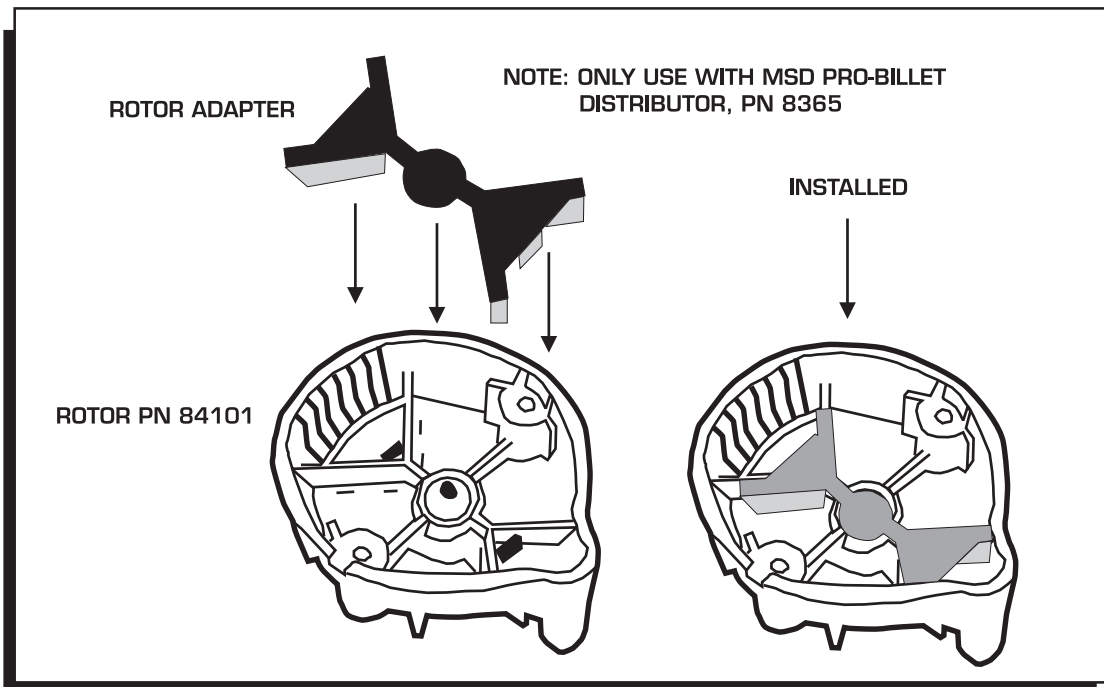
Installing the Rotor Adapter on an MSD PN 8365 HEI Distributor.
